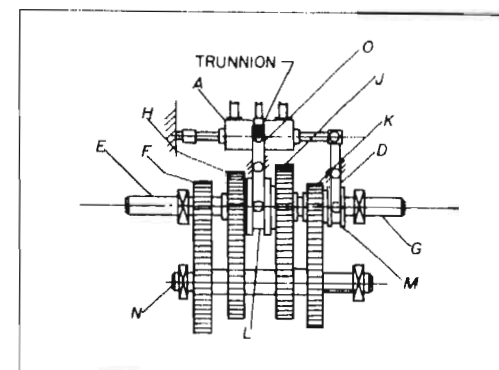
Triple-acting cylinder *A* permits remote control of this gear transmission. Either pneumatic or hydraulic operation is possible.
